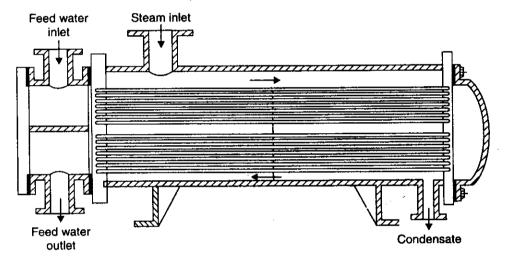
shows a *closed feed water heater*. It consists of a shell (made of a steel plate of suitable thickness) which has a welded longitudinal seam. To each end of the shell is welded a steel flange for fitting the covers, and on the top and bottom connections are provided for inlet of steam
